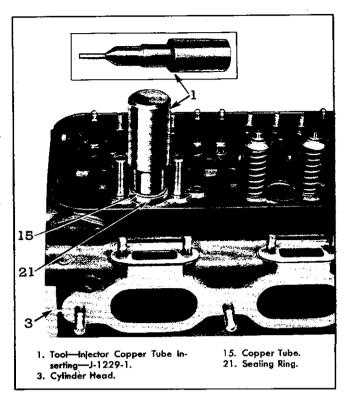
Installing Injector Copper Tube in Cylinder Head with Tool J-1229-1 (Operation 1).
